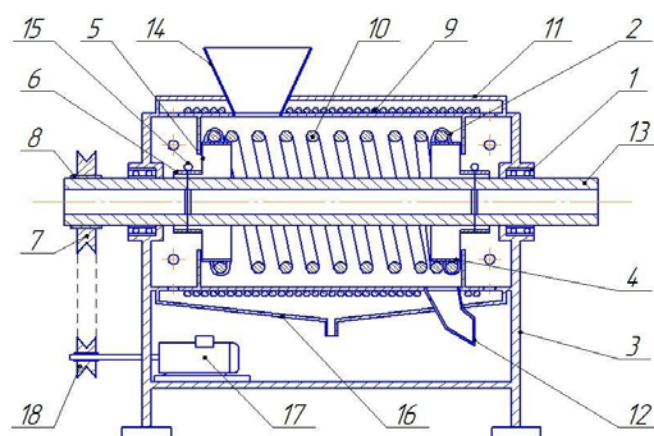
Diagram of a helical-screw manure dewatering device where 1 – bearing; 2 – bracket; 3 – bearing; 4 – cup; 5 – disk; 6 – sleeve; 7 – driven pulley; 8 – fastening of a pulley; 9 – spring; 10 – working on; 11 – casing; 12 – the discharge outlet for the dewatered
